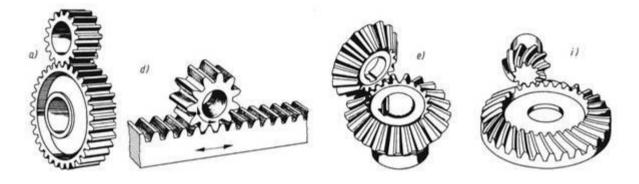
Basic types of gears depending on the position of the wheel axles mutual relatedness: a) cylindrical gear, straight teeth, d) rack with an external gear, e) bevel gear with straight teeth, i) cone screw-wheel-pair [16]
